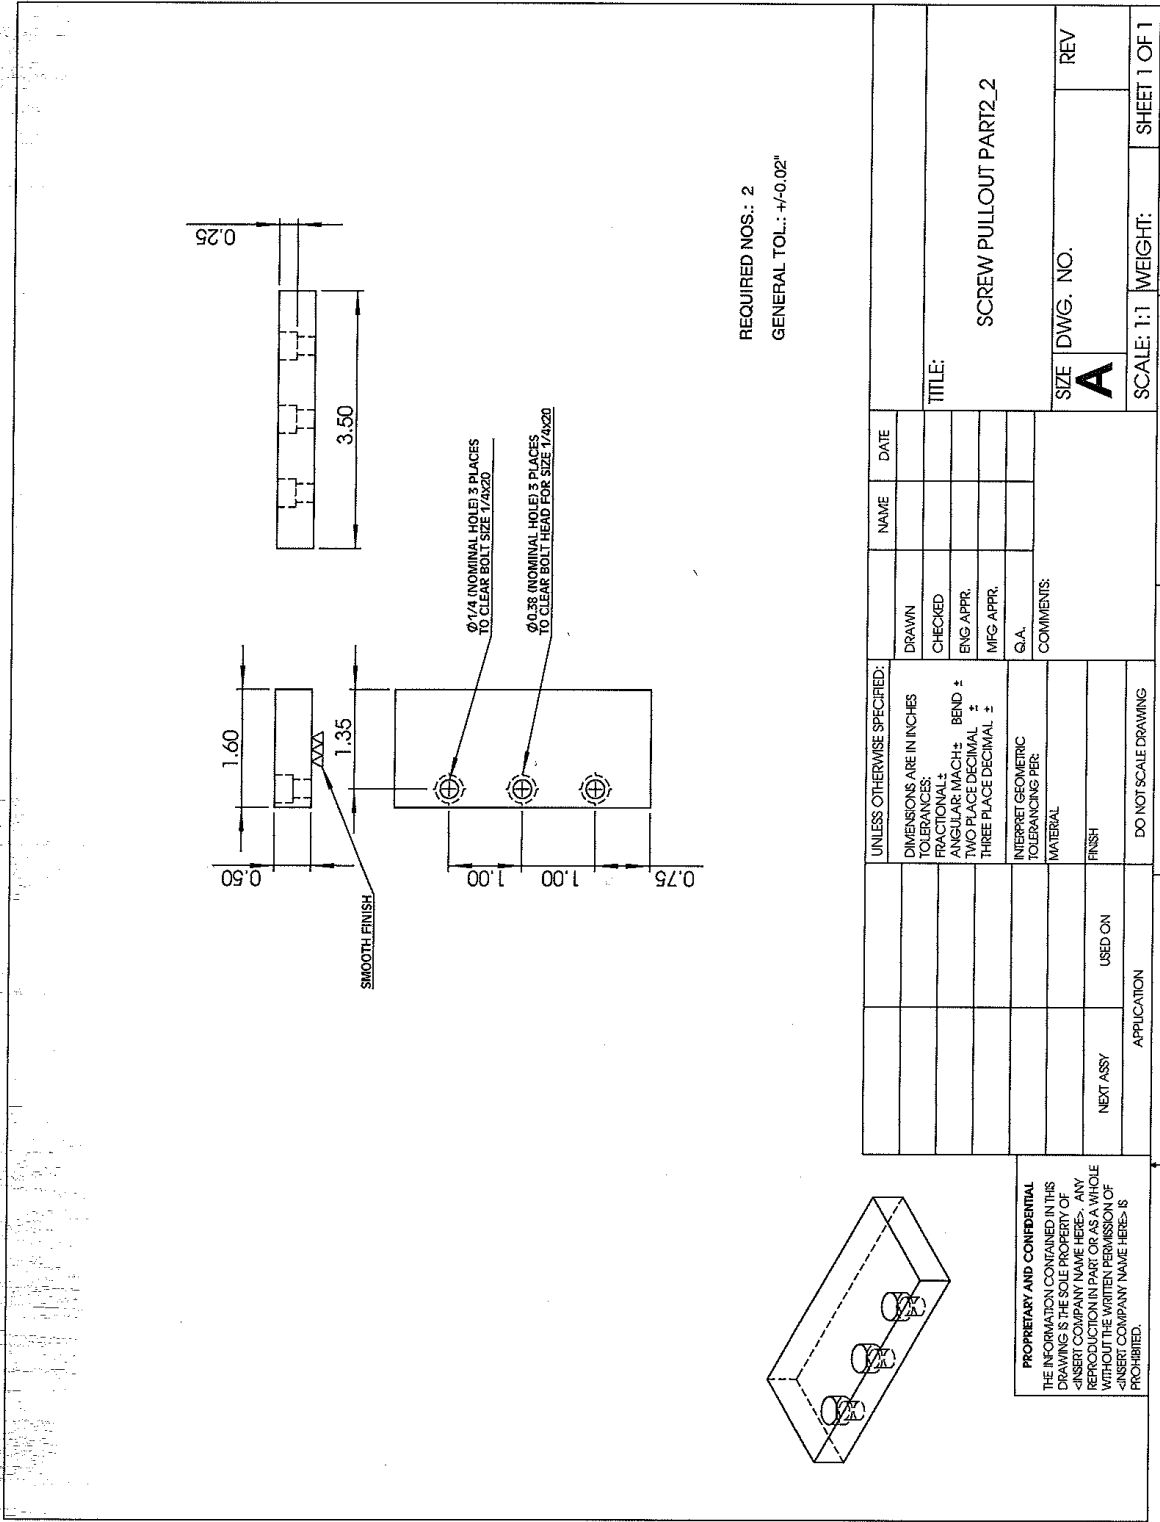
Screw pullout fixture, Bottom-part 2-2
